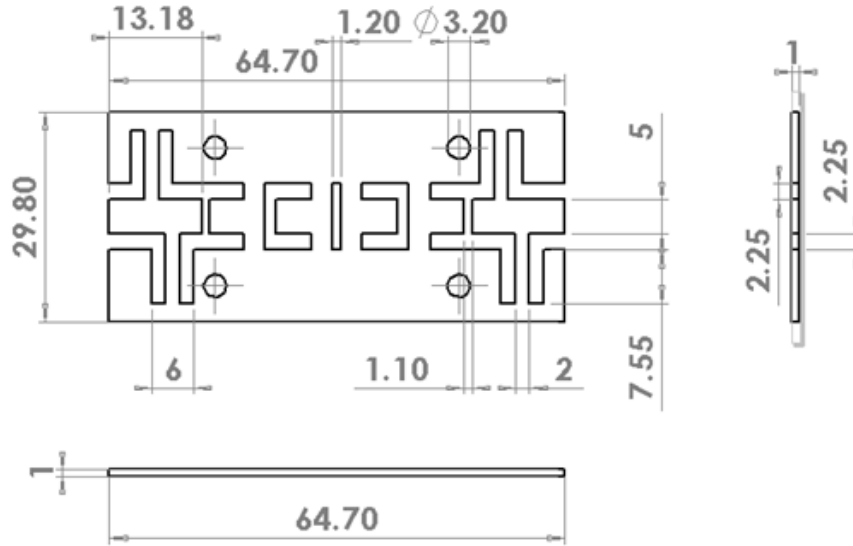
Technical drawing for layer 3 of the coaxial Chebyshev filter (dimensions in millimeters)
